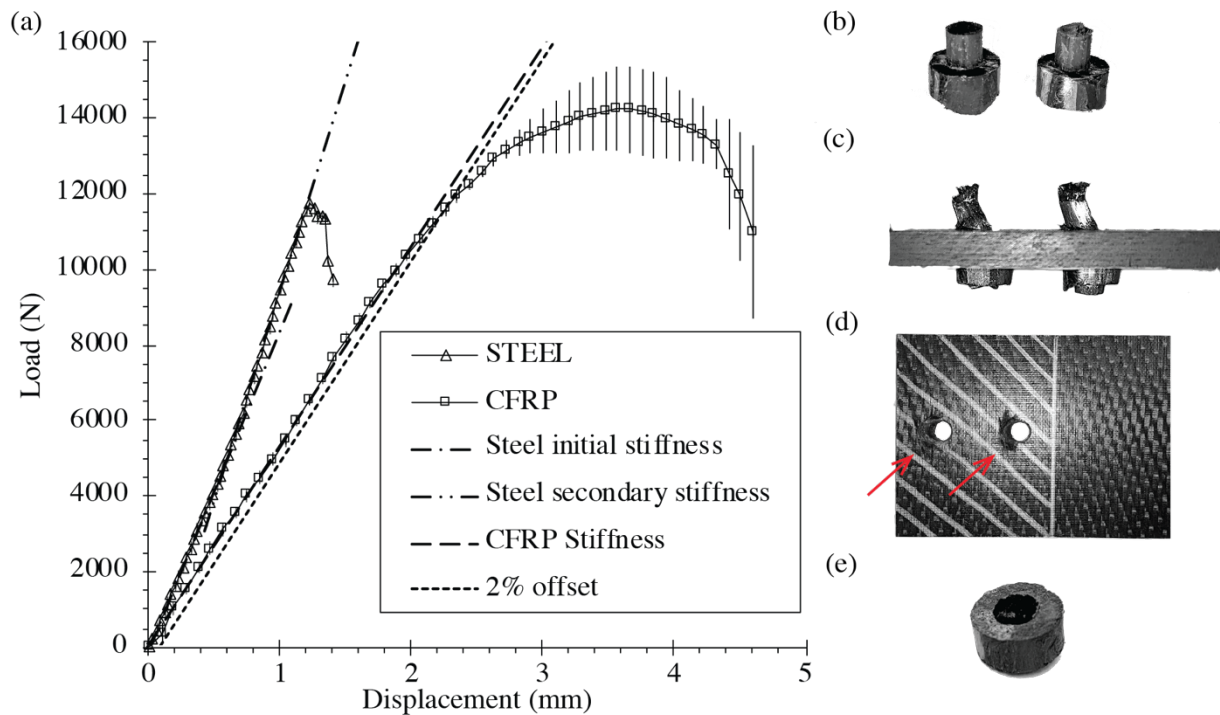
Mechanical characterization of the riveted joints. (a) Load/displacement response of the steel and CFRP riveted joints. (b) Mid-plane failure steel joints rivets. (c) Sideview of a failed CFRP joint with indication of fastener rotation. (d) Top view of a failed CFRP coupon with indication of bearing failure. (e) Typical tensile failure at the connection between the shank and the head from CFRP joints.
